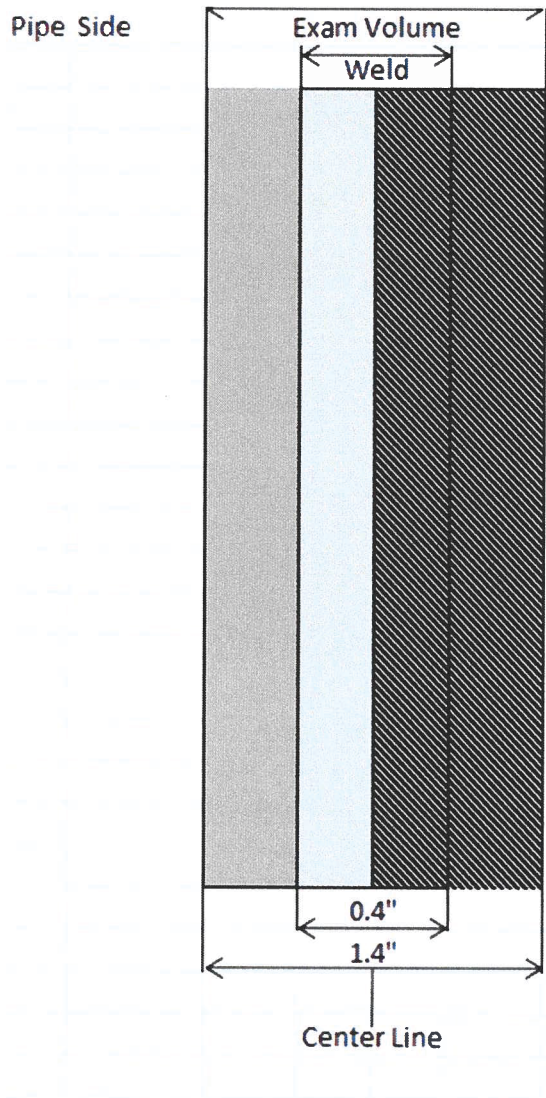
Figure E- Weld WCS-003A-XI-FW003 Coverage (Pipe-to-Valve Weld)
